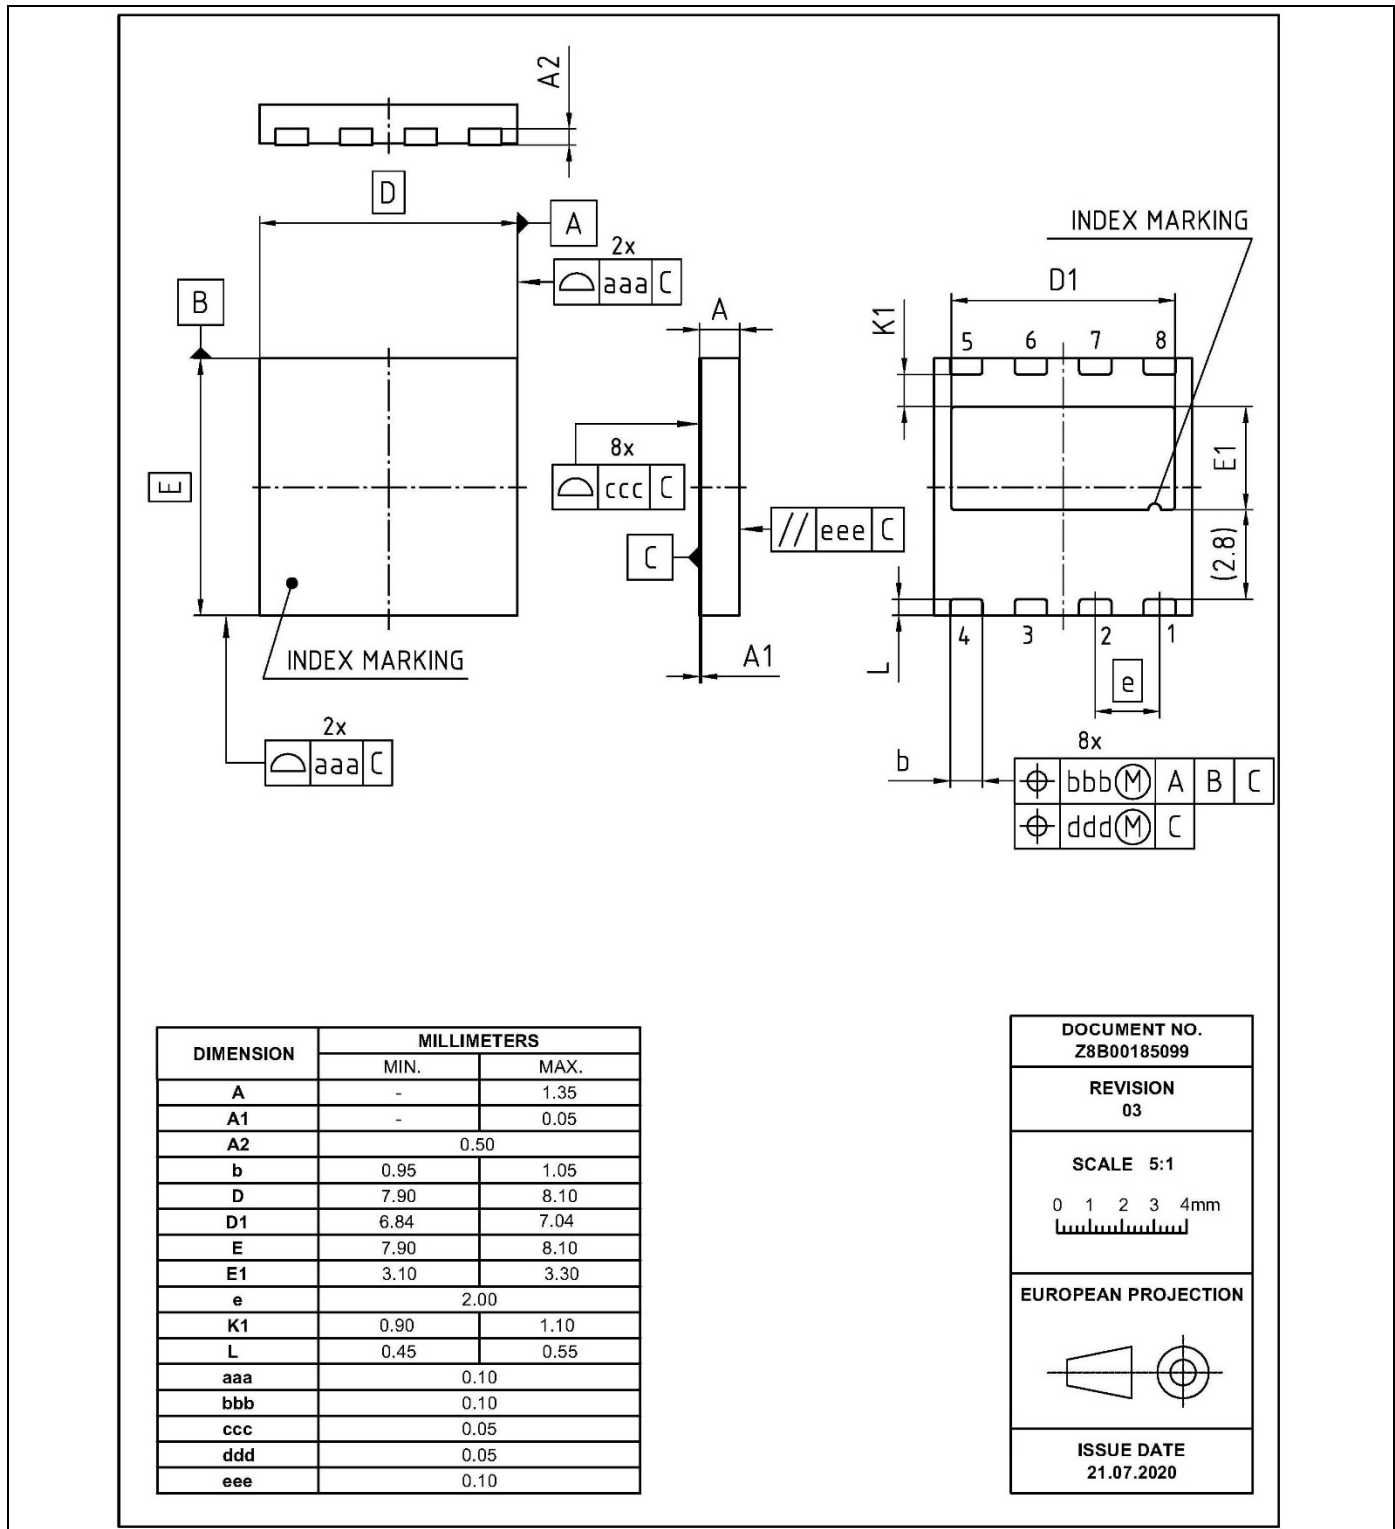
PG-LS0N-8-1 Package Outline, dimensions (mm)
